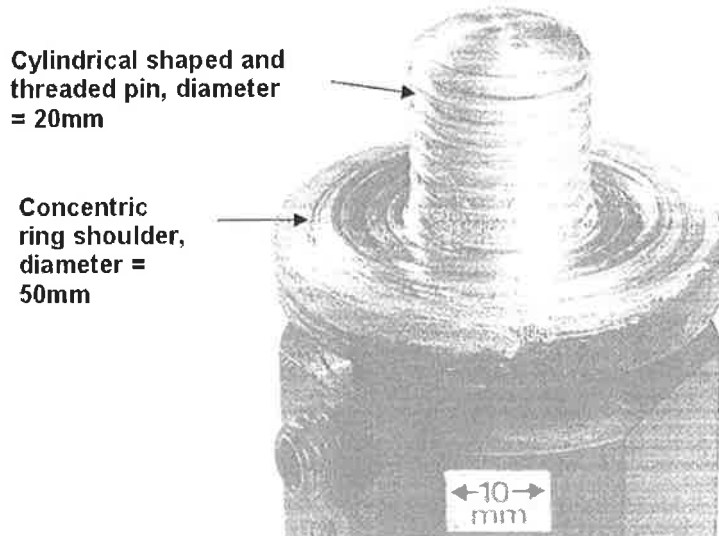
Conventional 5651 tool technology pin i.e. cylindrical and threaded as used in the TWI study [32].
